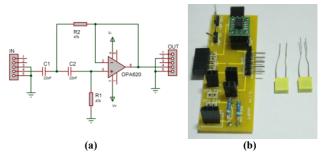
The Sallen-key high pass filter: (a) Circuit schematic; (b) PCB implementation (26.75mm x 62.65mm)
